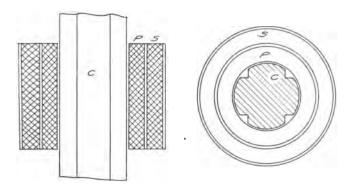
CROSS-SECTIONAL END AND SIDE VIEWS OF ONE LEG OF A CORE TYPE TRANSFORMER
